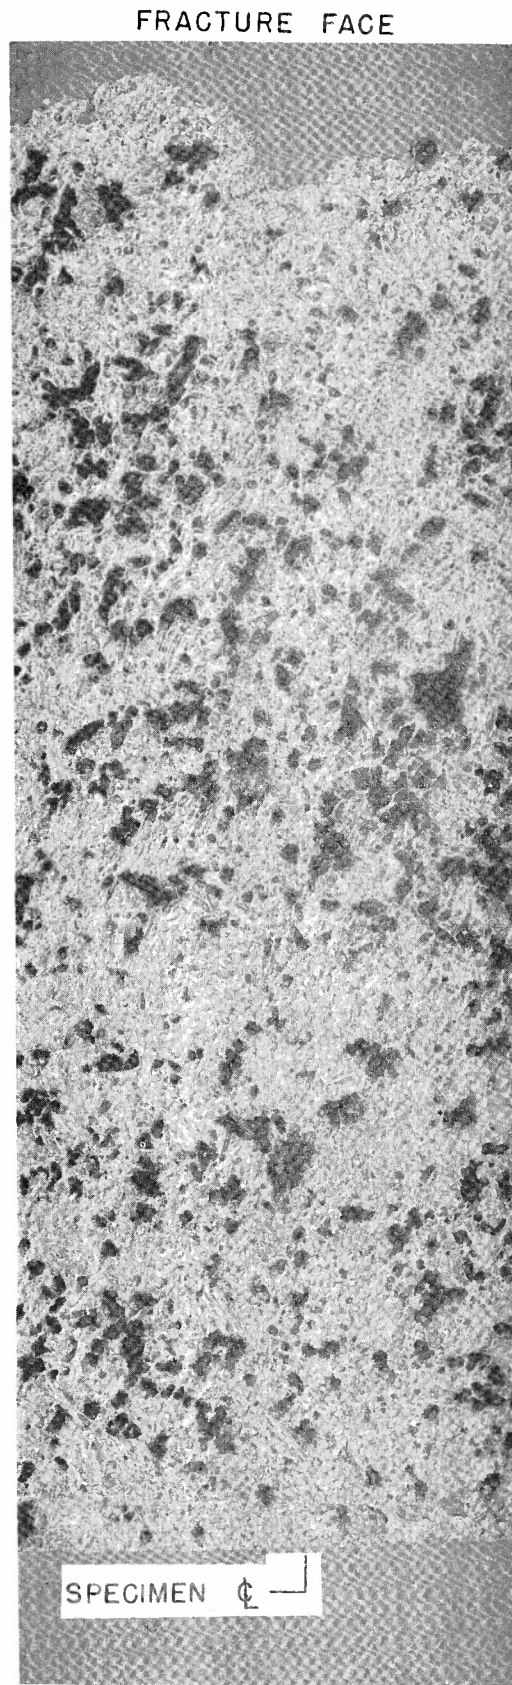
Flick Inspection Results of Fracture Faces of Weak Specimen 44 from Slab 4 of ATJ-S Billet L-4-6
